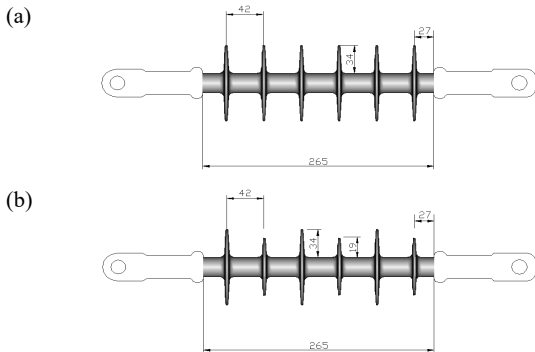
Insulator dimension used in tracking wheel test. (a) Regular type and (b) alternative type.
